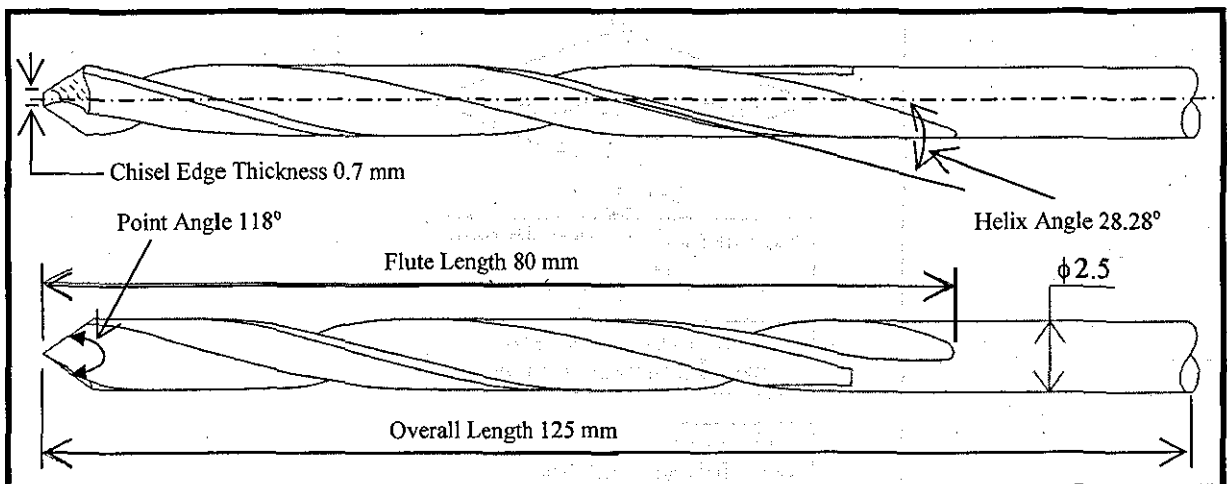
Specification of the Industrial Drill Bit of Dormer Make
